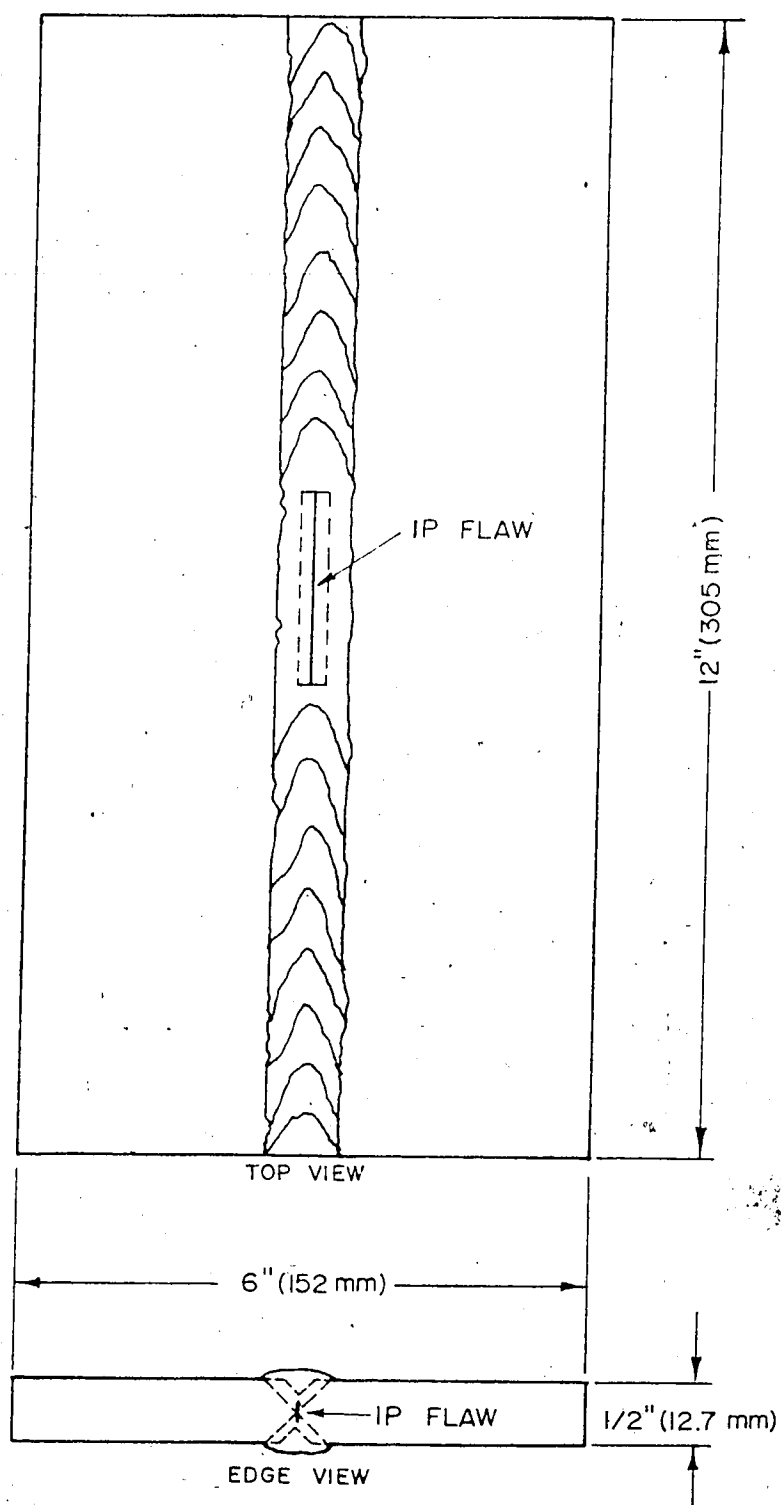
Specimen 3 - Artificially produced incomplete penetration flaw.
